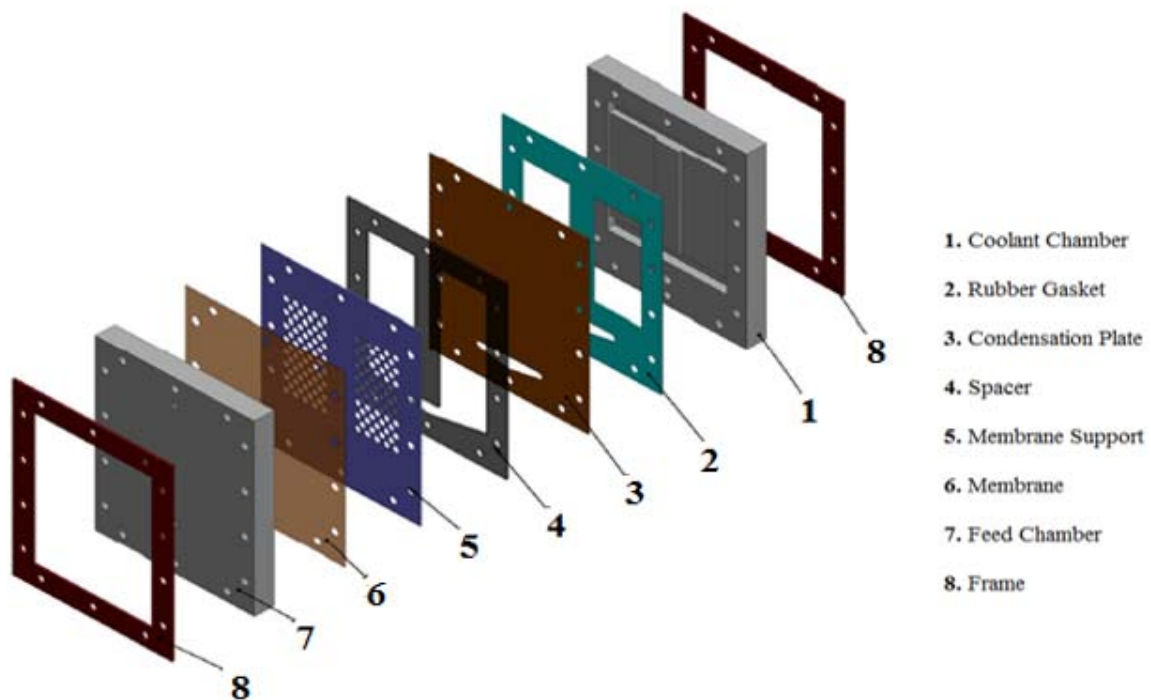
an exploded view of the AGMD used in the experimental setup
